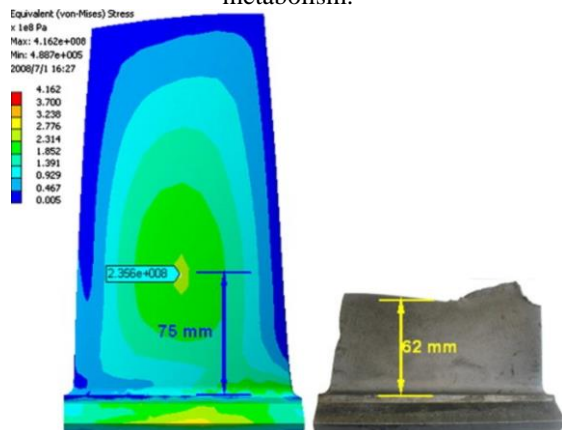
It is well known in mechanical engineering that modal analysis could predict the fracture pattern.
